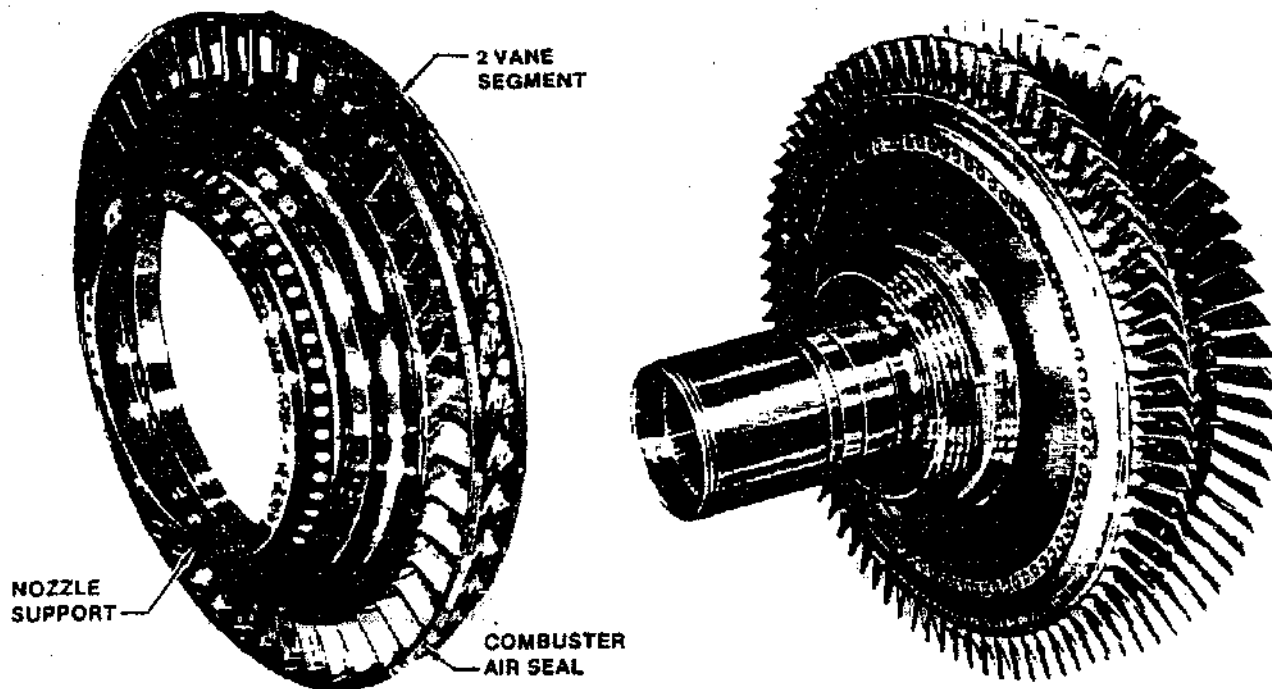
Typical HPT Nozzle and Rotor Assemblies
